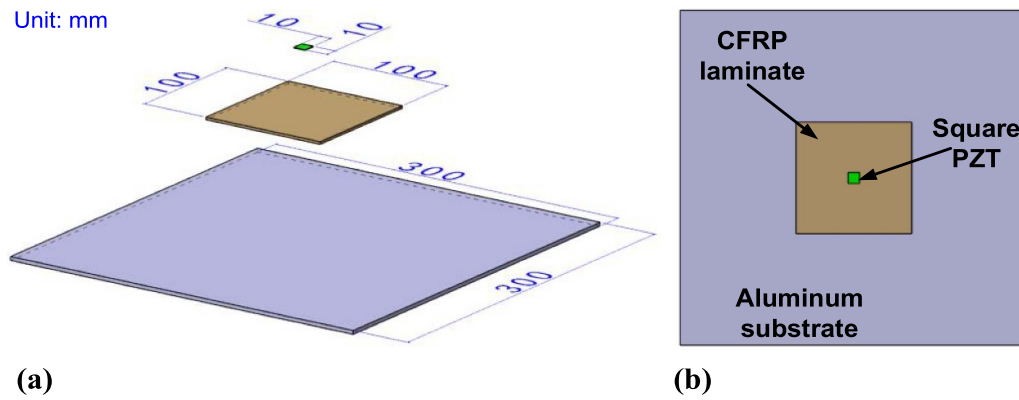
3D explosive view of specimen: (a) overall dimensions, (b) components.
